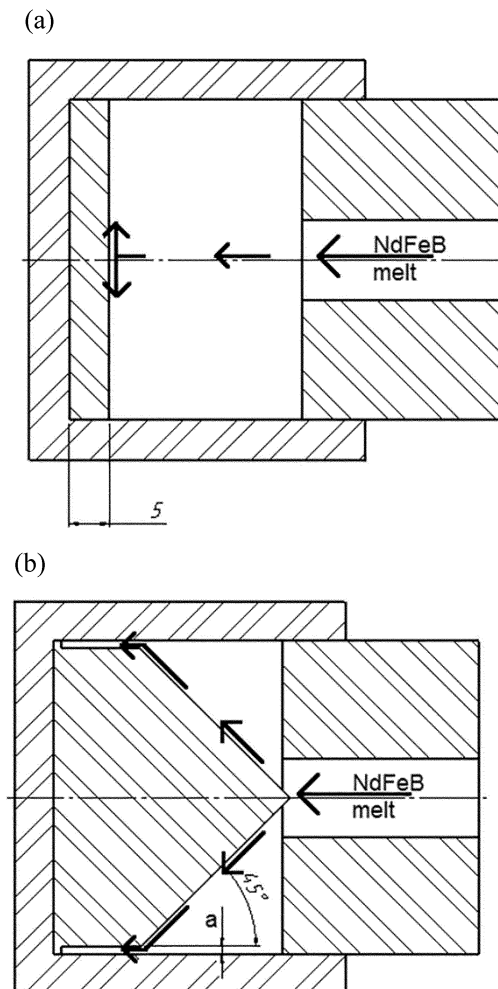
Sketch of the centrifugal casting mould design: (a) initial version, (b) modified version. The black arrows show melt flow.
